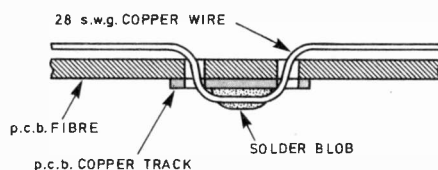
Cross section of solder joint and method of threading copper wire through Diode Gate p.c.b.s
